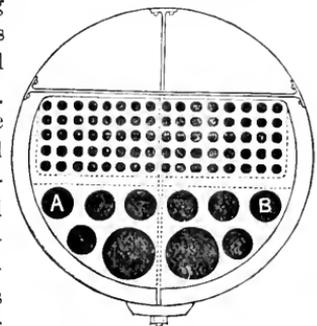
Section through the back smoke chamber giving a rear view of the rear tube plate, with the ruptured tube omitted. A and B the ruptured 10-inch flues.
